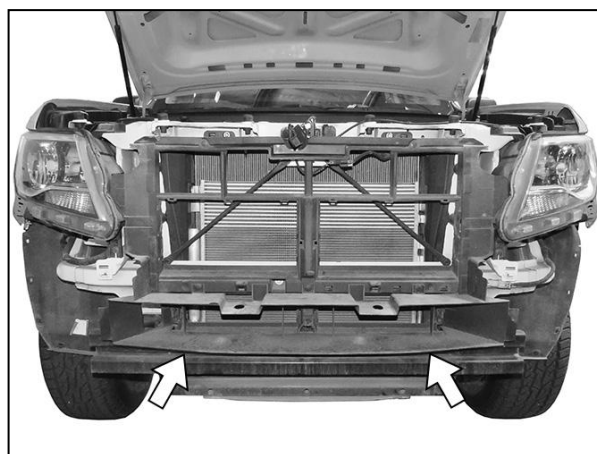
Pull back fender liner to access bumper hardware and unplug fog light if
